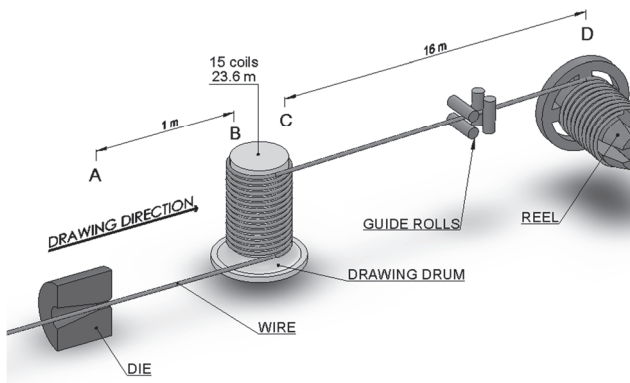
Scheme of drawing process with marking the A-D cross-sections on a length of drawing line
